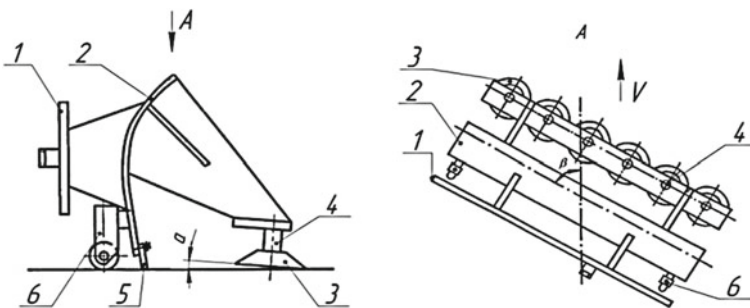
Working body to remove the snow-ice formations from the road surface: 1—base plate; 2—blade; 3—cutting disc; 4—axis; 5—elastic mouldboard blade; and 6—castor
